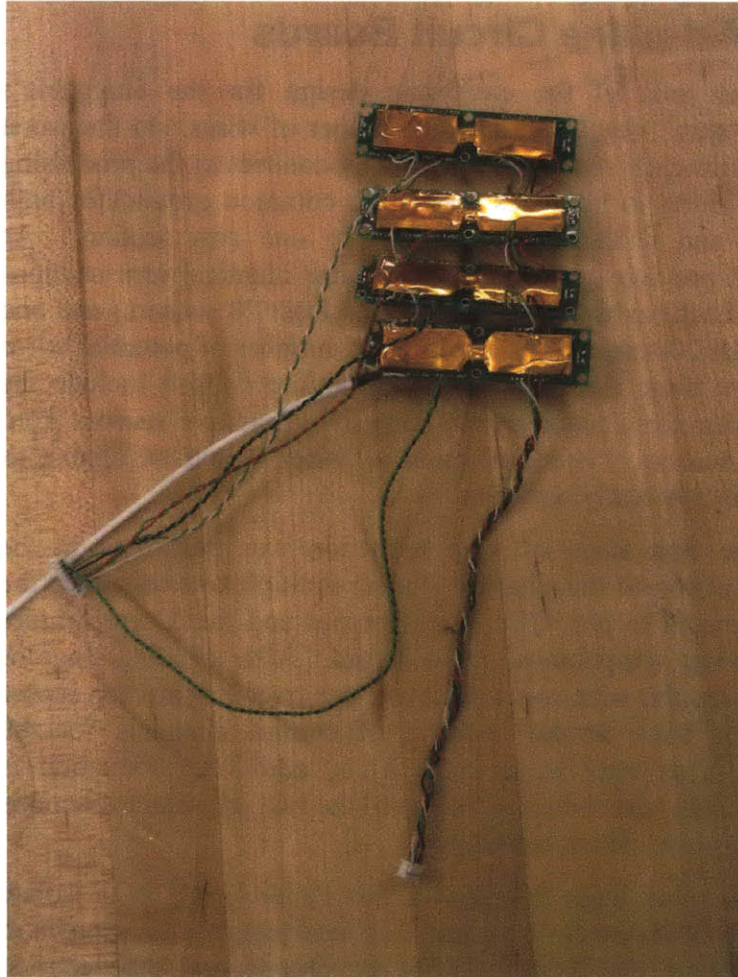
The Assembled Top and Left Side Arm Sensor Circuit Boards.
